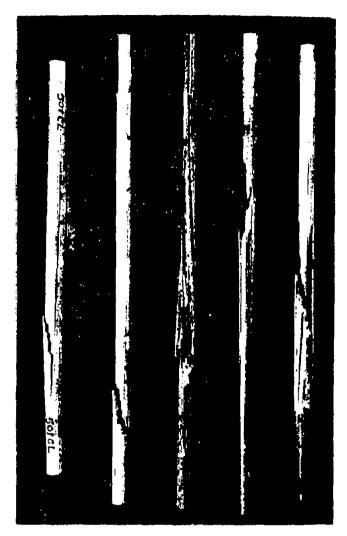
Static torsion specimens showing type of fracture, round cross-sections; left to right, materials CL, O, R, P and G.
